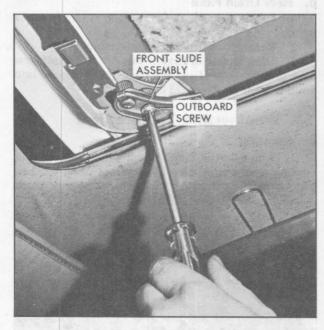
Removing Outboard Screw From Front Slide Assembly
